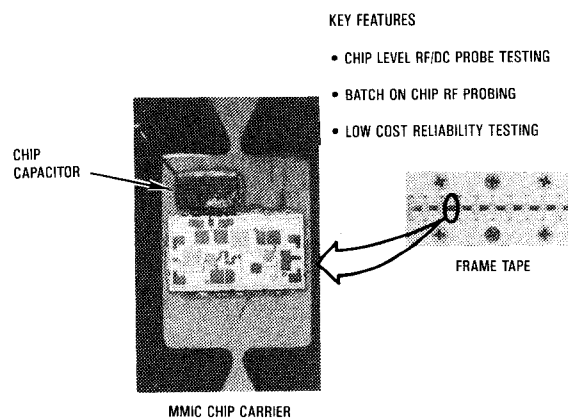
Frame Tape MMIC Chip Carrier for Multichip RF Testing and Packaging
